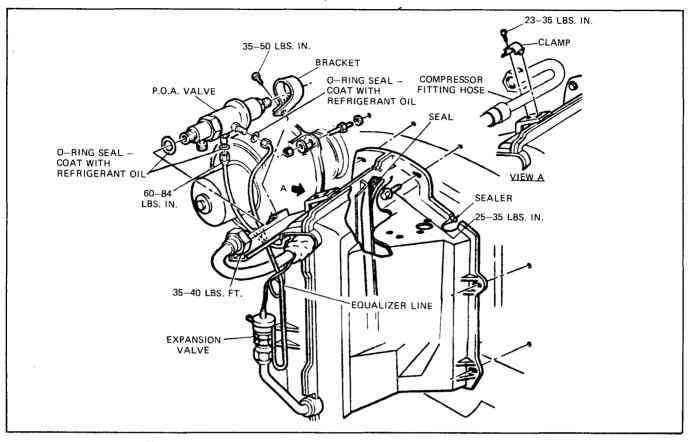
A-107A X Series Evaporator and Blower Assembly (with 307 Engine)
